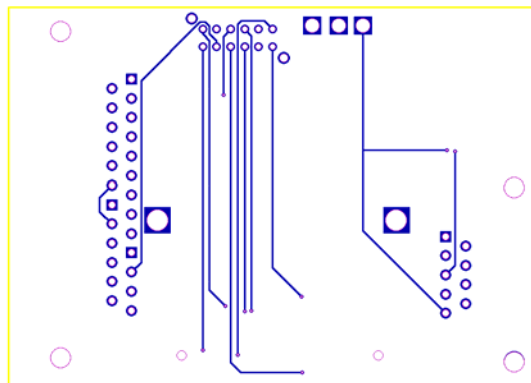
Bottom layer PCB layout for the Rene programming board.
